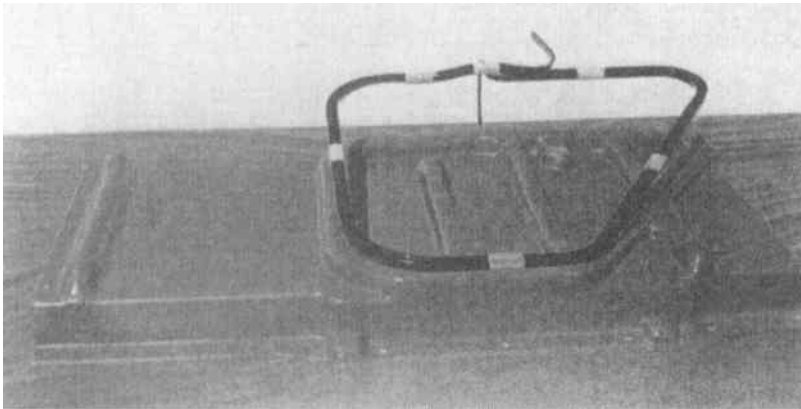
Side plate of an arc chute showing the blow-out coil and its assembly location.
